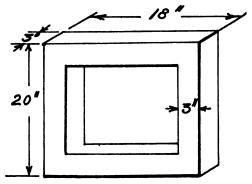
OVERALL DIMENSIONS FOR THE CORE OF 5 KW. TRANSFORMER
